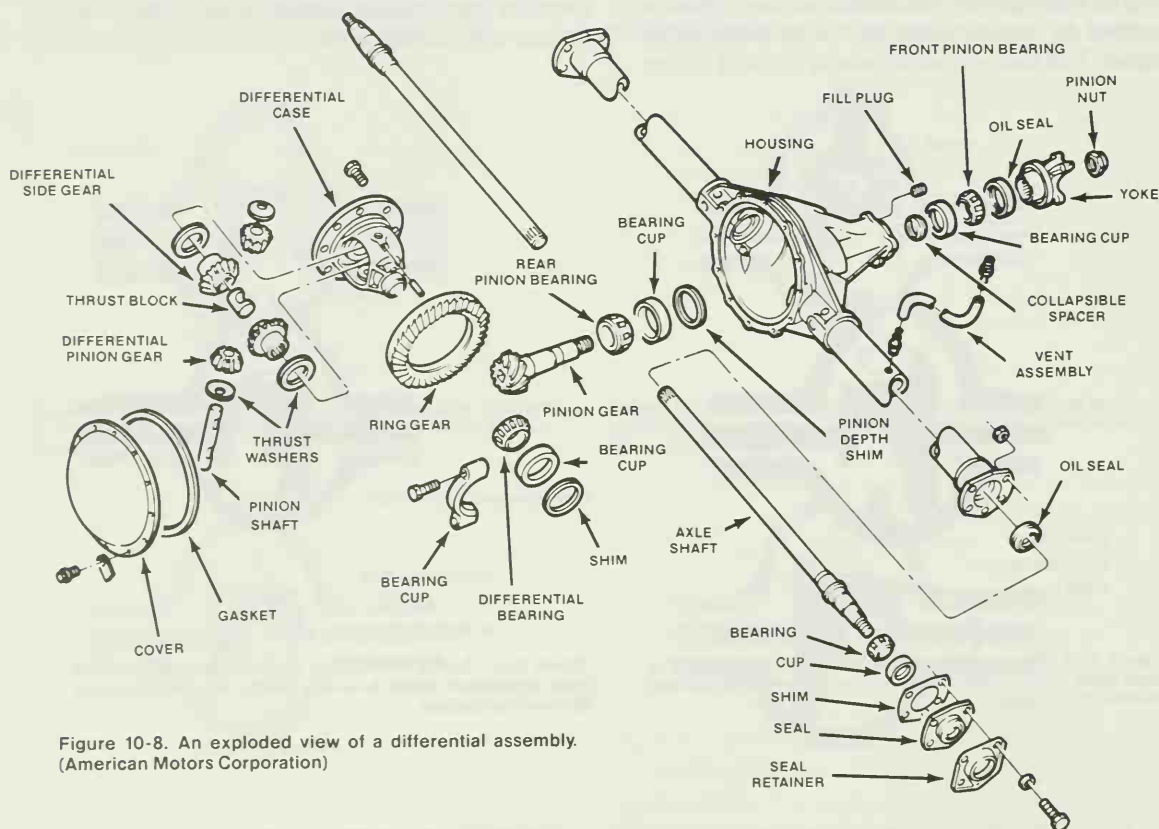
An exploded view of a differential assembly. (American Motors Corporation)
